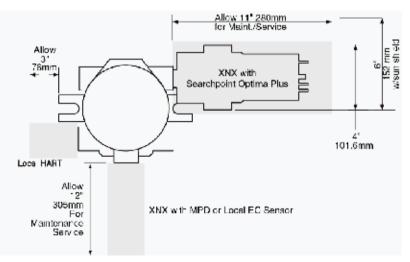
XNX Universal Transmitter mounting dimensions and clearances
